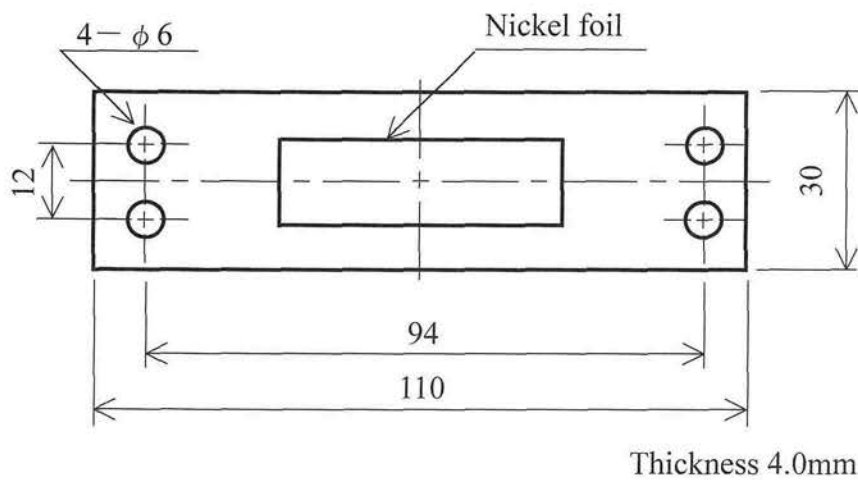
Geometry and dimensions of test specimen for making precrack
